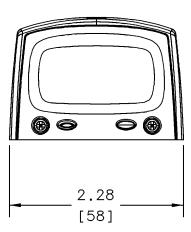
Symbol MS2204VHD Mechanical Drawing
